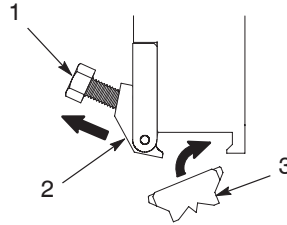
Removing/installing a nozzle (meltblown nozzle shown)
